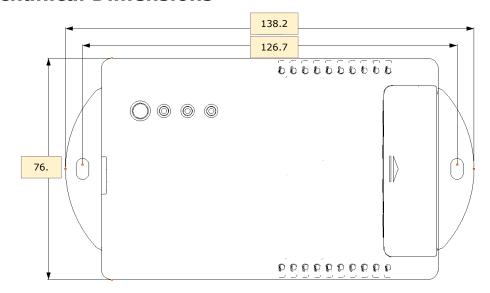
LDSBus 2CH NL Relay Dimension - Top View
